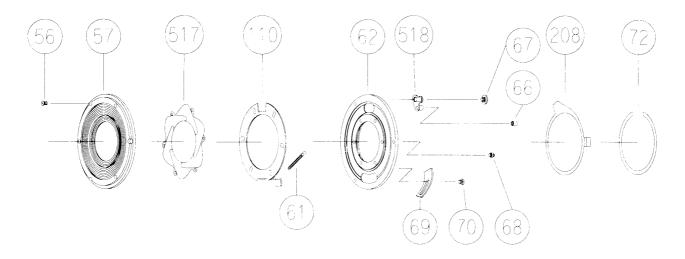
Pentax Diaphragm Housing Assembly (Ref. 529)
